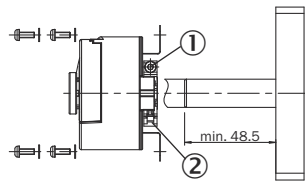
Installation for through hollow shaft encoder with metal hollow shaft clamping and stator coupling
